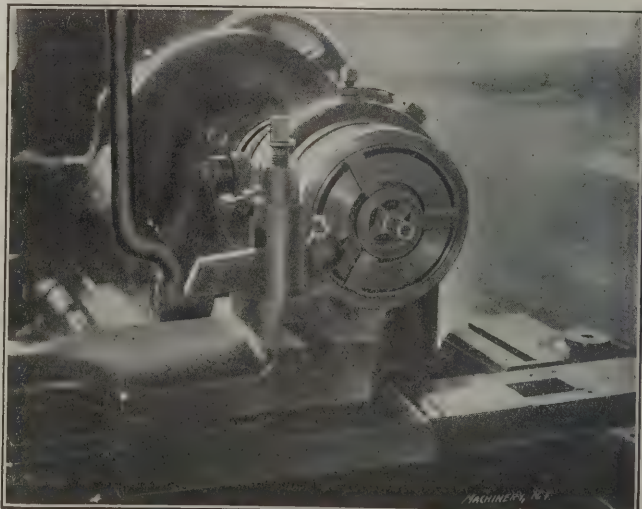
Attachment arranged with Step Jaws for holding Castings, Disks, Etc.
